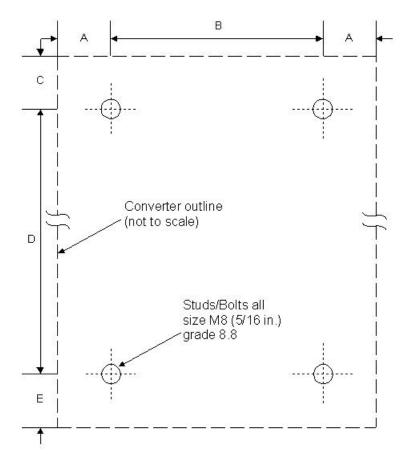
Bolt Stud Locations for Mounting the Converter on a Panel
